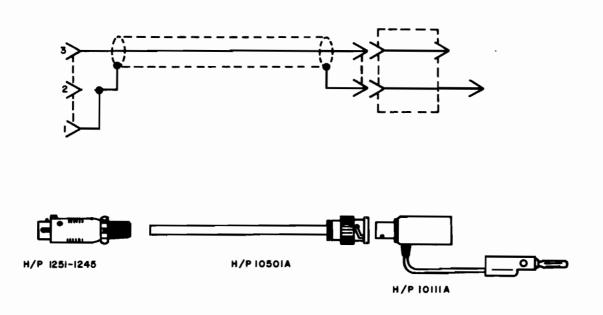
RECOMMENDED TEST CORD FOR TESTING THE MODEL 117/4917A
